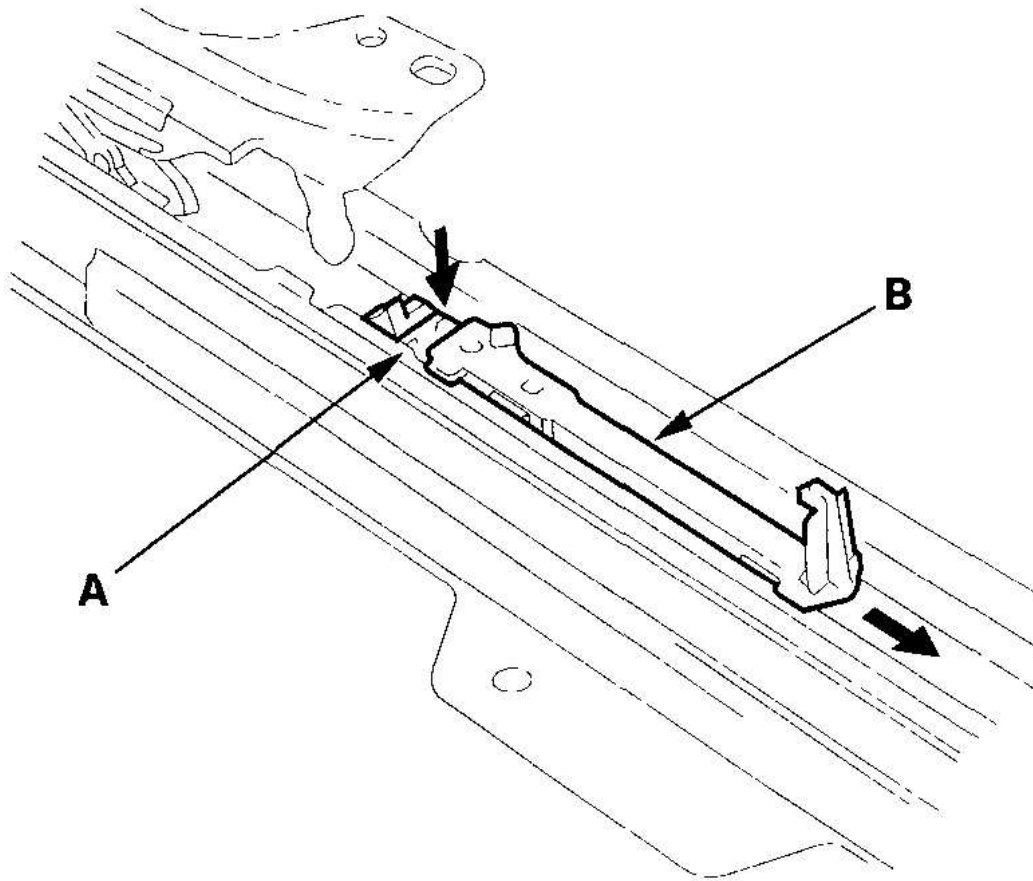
Removing Slide Stops And Cable Tube Rear Brackets
